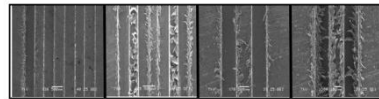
c: From lift , top burr formation for (500,400,300 and 200 μm) tool diameter at 1 mm/min cutting speed and 3000 rpm spindle speed.
